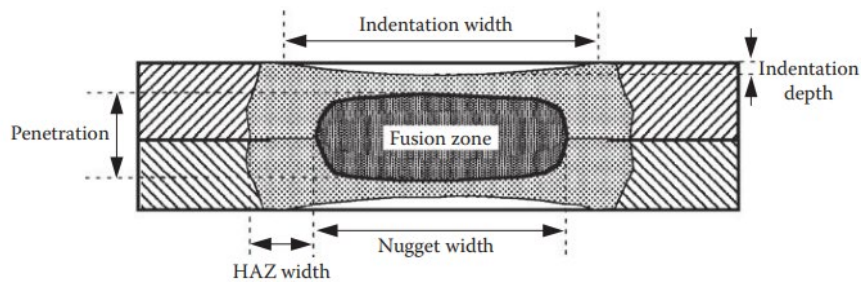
Cross sectioning of spot weld macrostructure [11]
